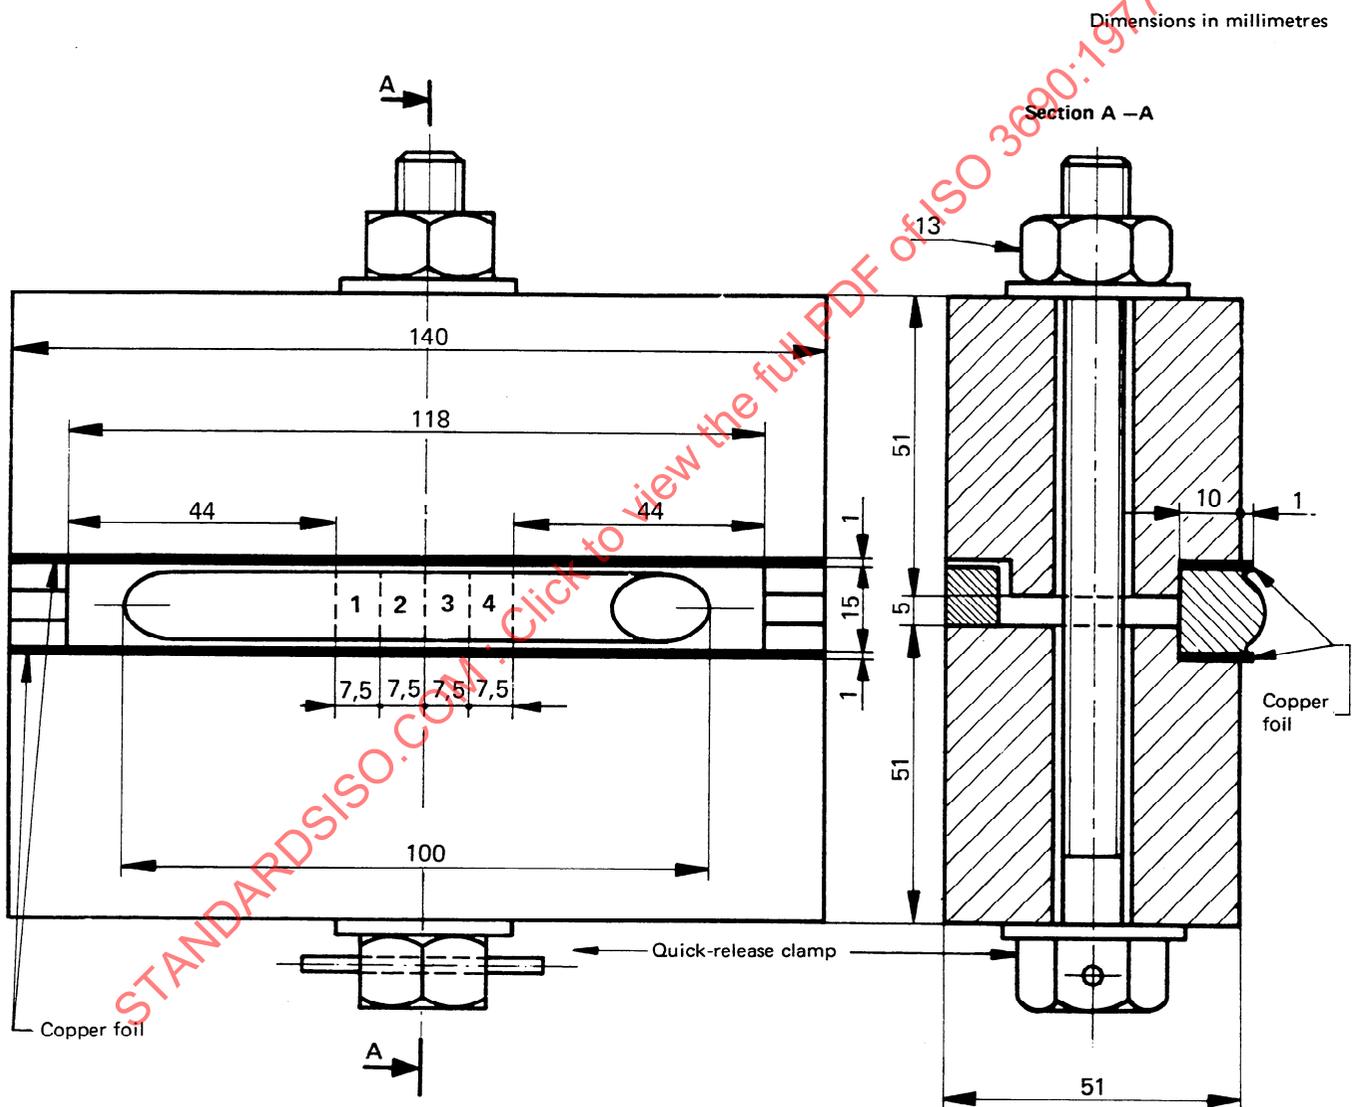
Test piece assembly for hydrogen sampling of weld deposits
